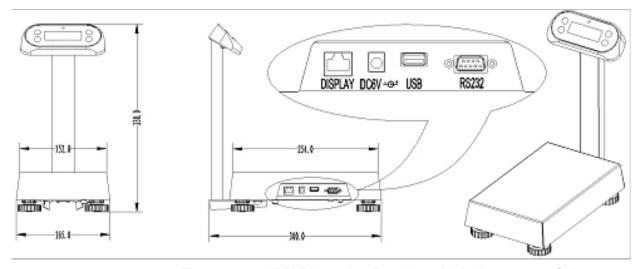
67XXU Dimension Drawing with Indicator on a Column
